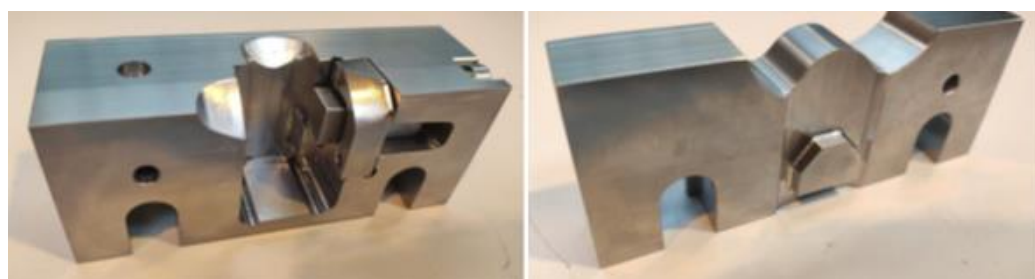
Manufactured the second version of the fixture for clamping workpiece
